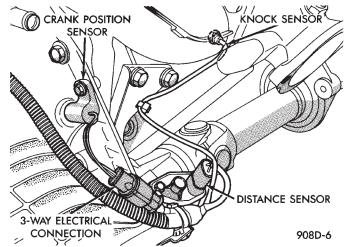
Remove Crank Position Sensor (D.I.S. Ignition Only)
